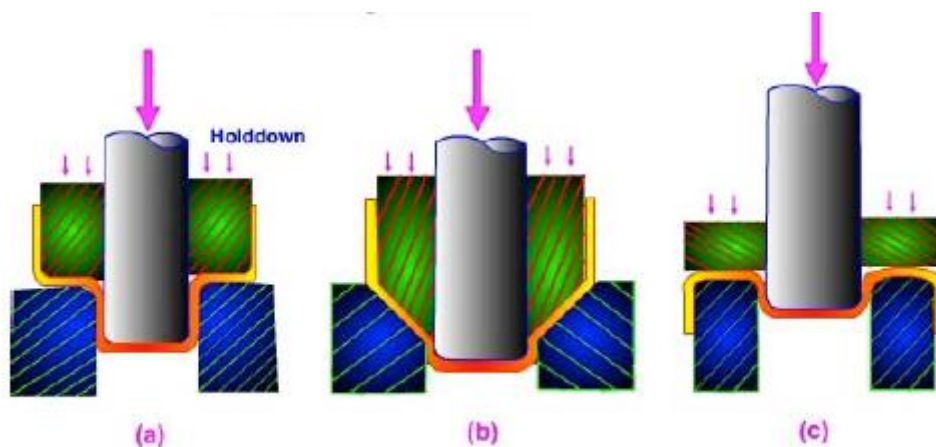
Redrawing Methods (a) Direct redrawing (b) Direct redrawing with tapered die (c) Reverse redrawing
